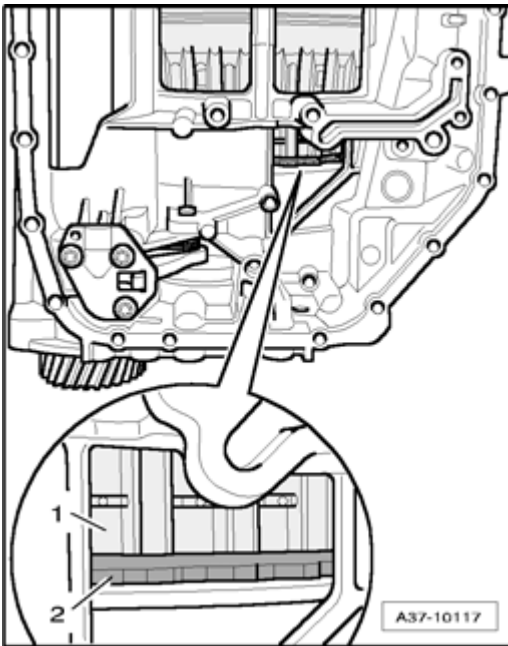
Freewheel Splines In Cylinder "F" Engaged In Splines Of Ring Gear Of Planetary Bar
